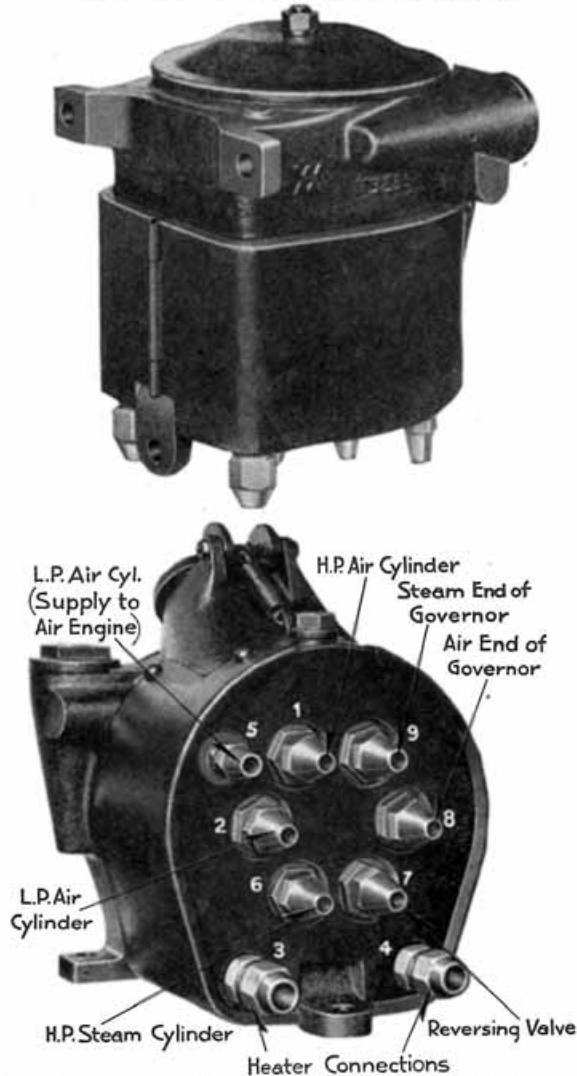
Photographic Views of the Type "F-1-A" Mechanically Operated Lubricator
